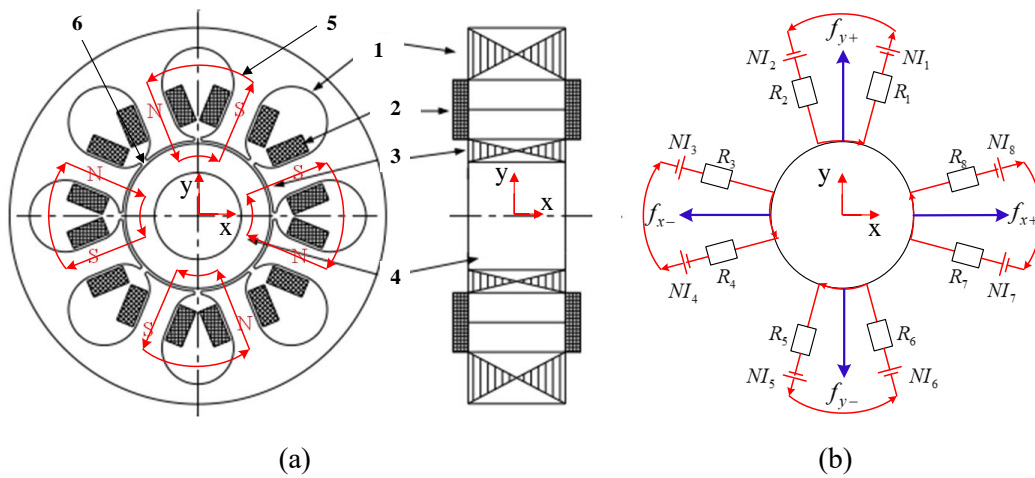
The magnetic path of the radial AMB, (a) the cross-section drawing of the radial AMB (1--the stator, 2--the windings on stator, 3--the magnet rings on stator, 4--the rotor, 5--the magnetic flux of winding, 6--the airgap between the stator and the rotor), (b) the equivalent magnetic circuits in four radial airgaps of the radial AMB.
